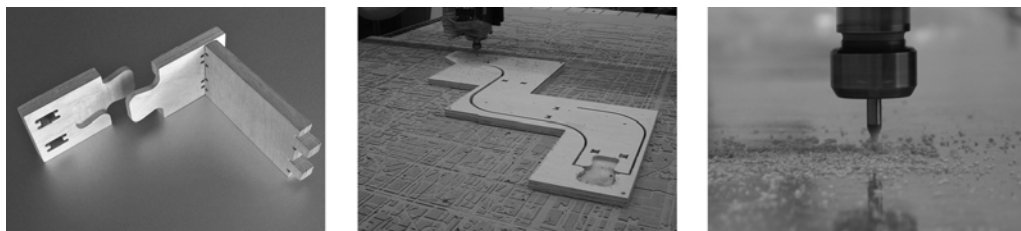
a) CNC-generated dovetail joint and plug-in connection; b) milling of a designed section segment; c) milling of the GRP
